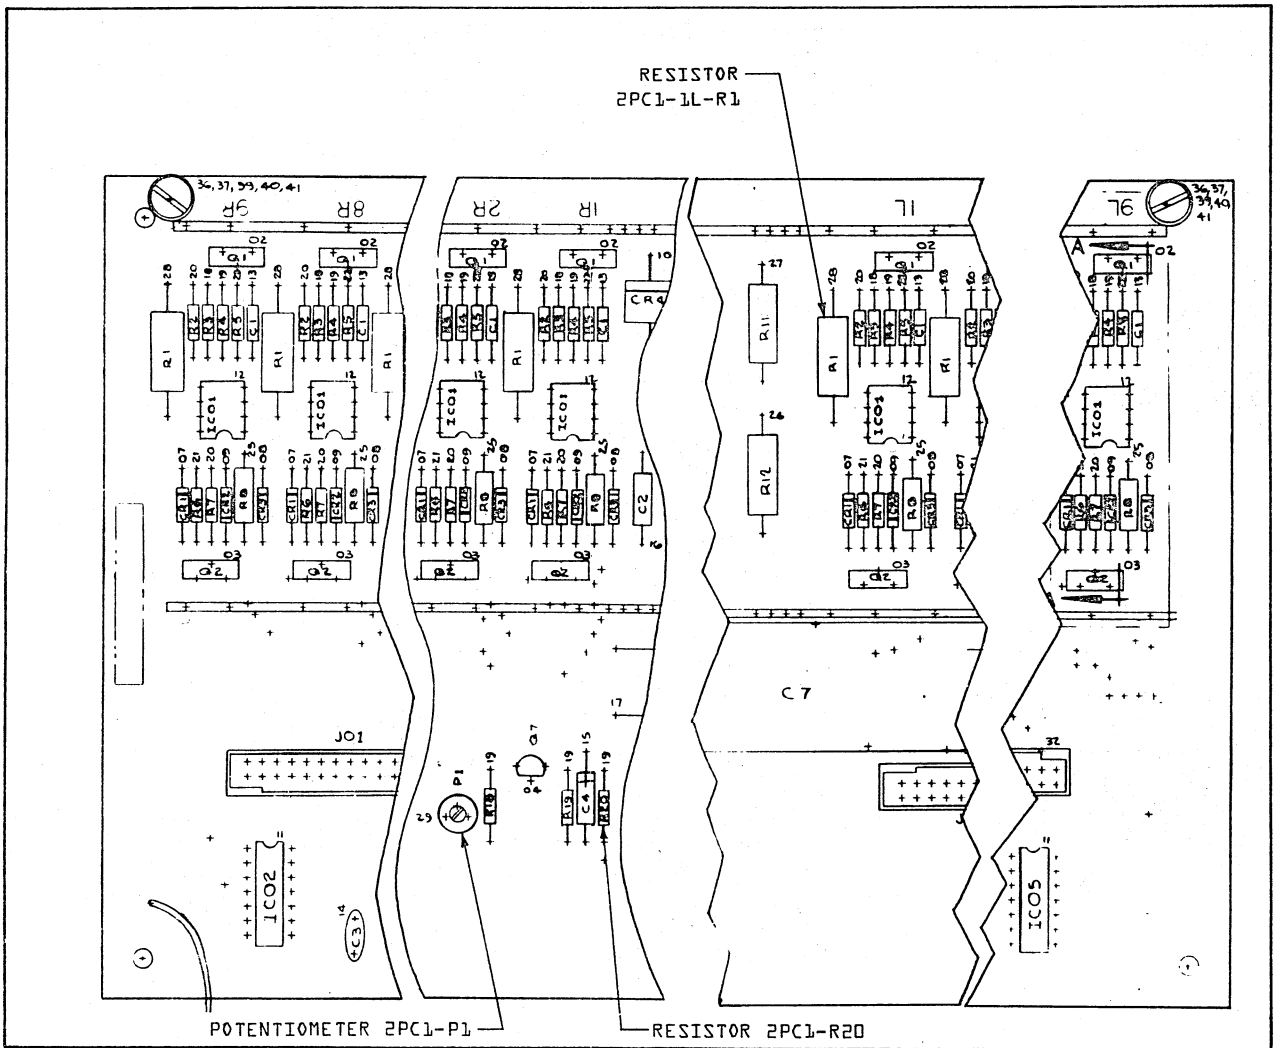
NEEDLE DRIVER BOARD ASSEMBLY (CARD LOCATION 2PC1)
